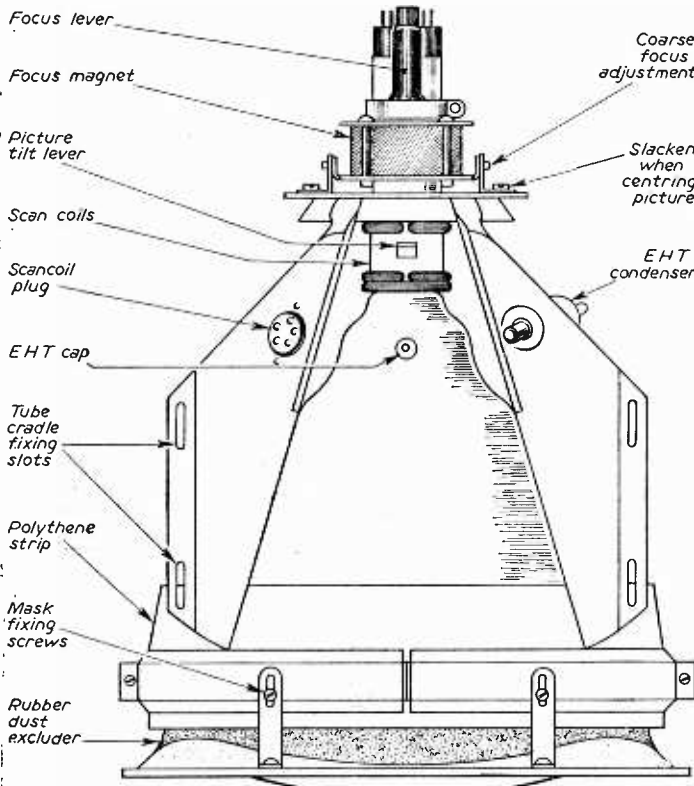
Detail of the T161 tube cradle assembly—top view.
